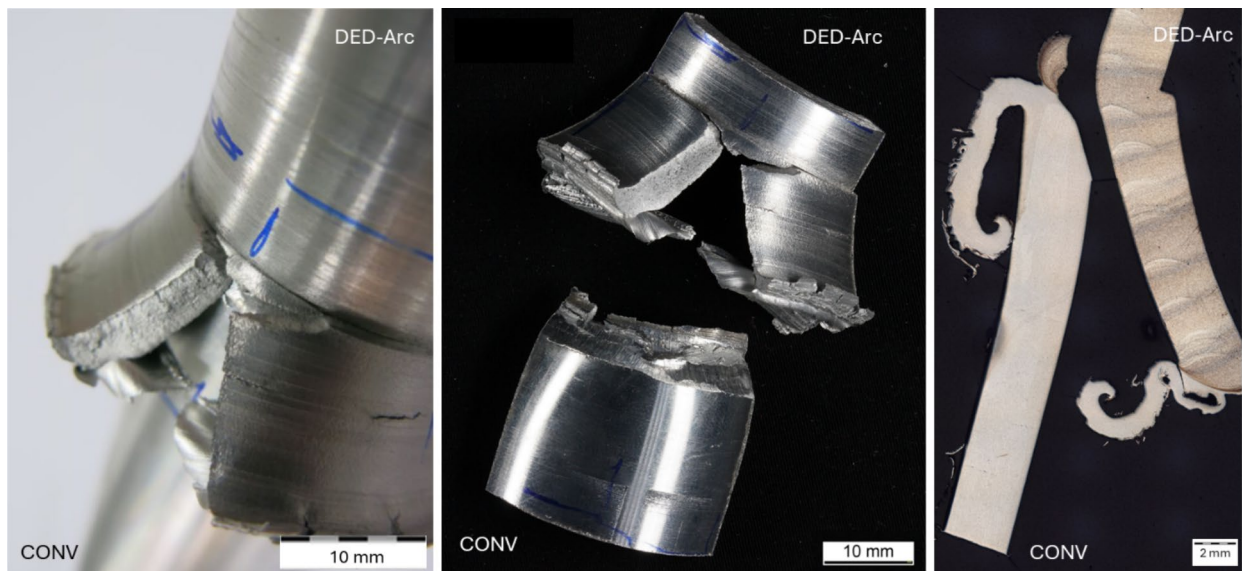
Fracture during RFW process of conventionally manufactured EN AW-5083 to DED-Arc manufactured ER 5183 parts
